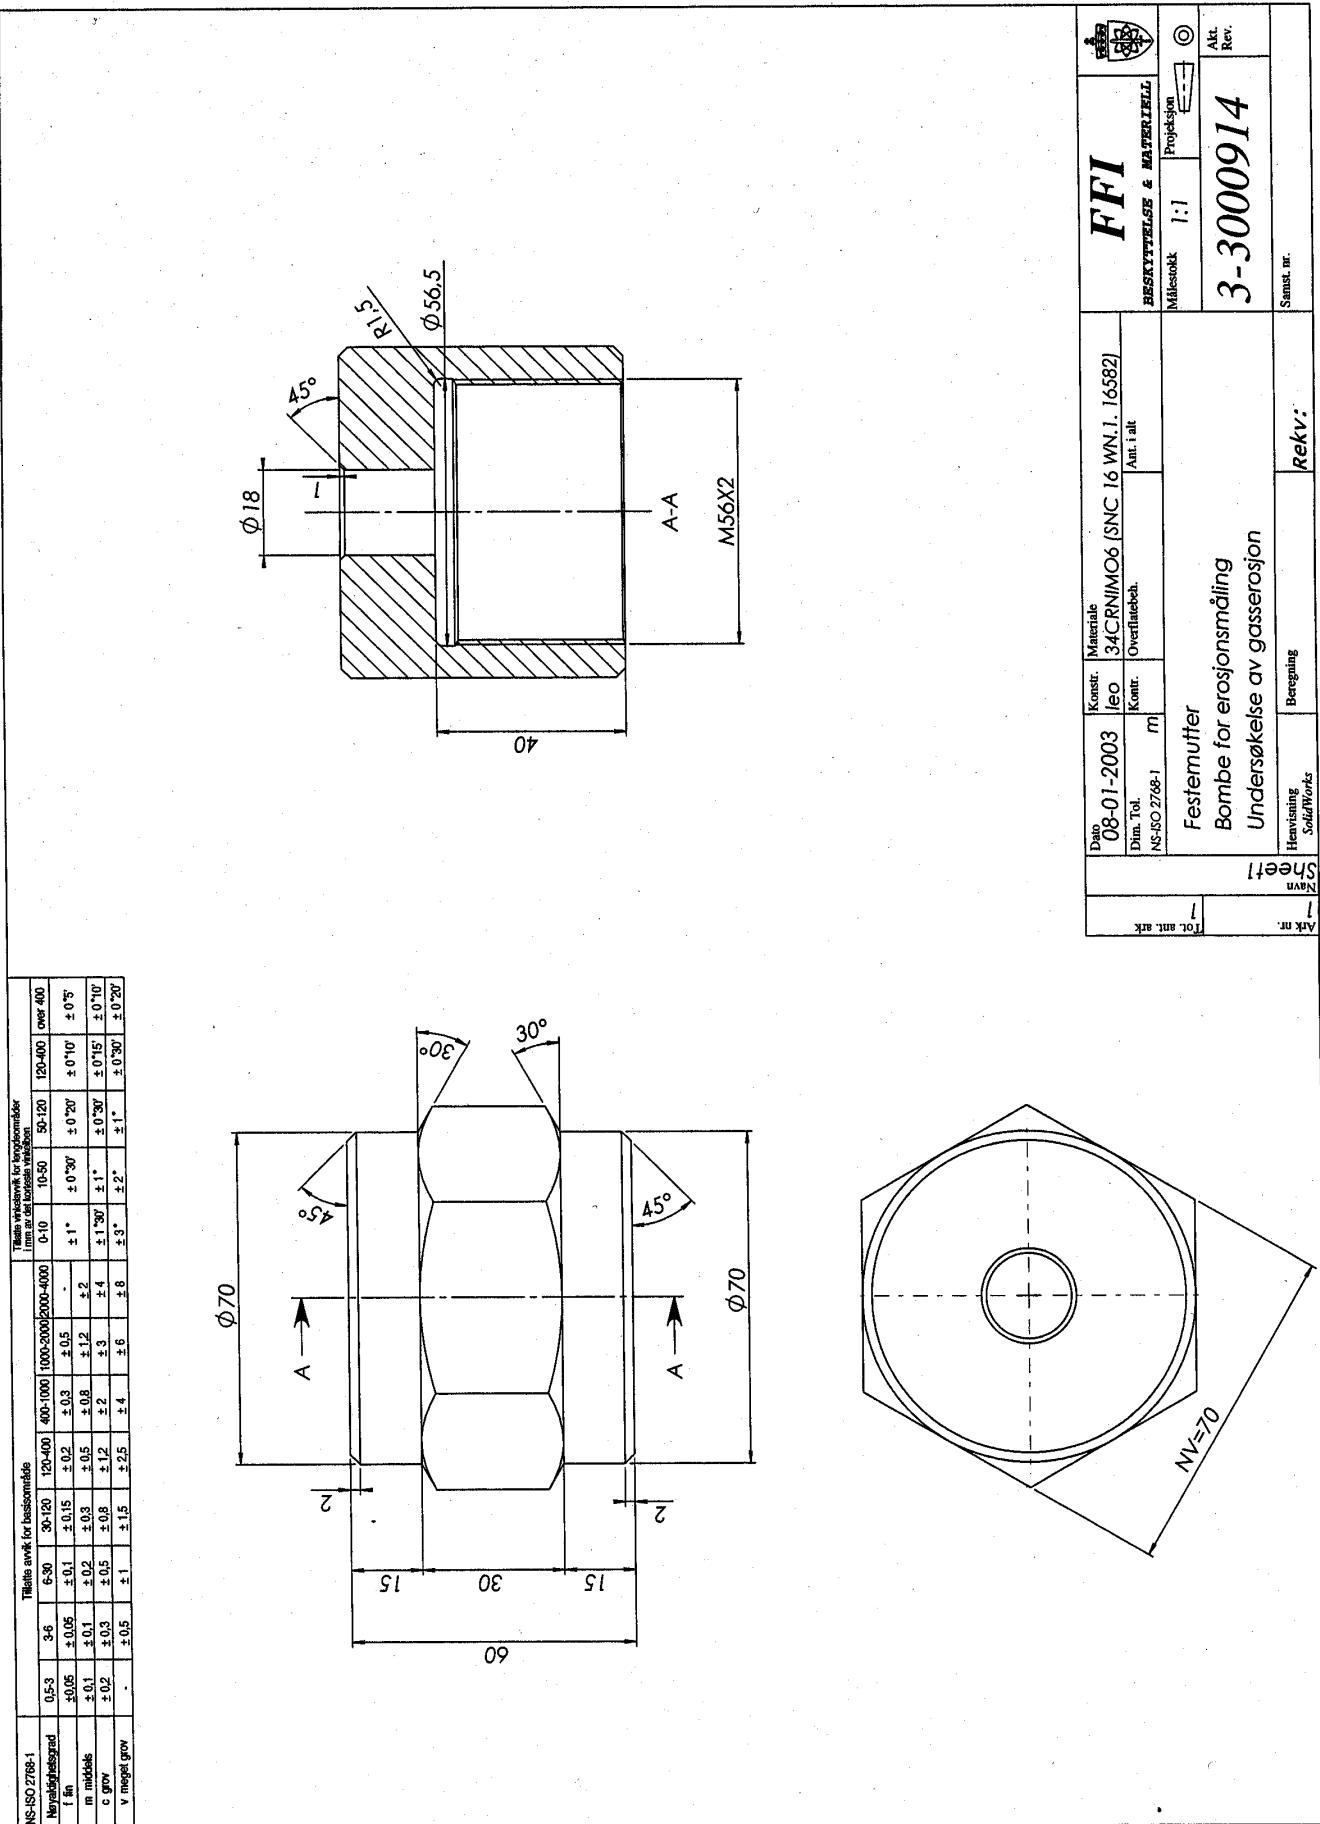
Drawing of the modified adaptor socket of the nozzle holder.
